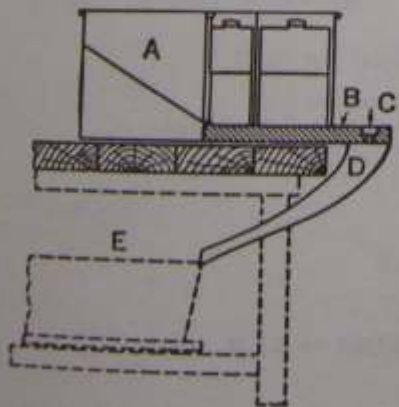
Cross-section of bins showing chute for drop delivery: *A*, bins with sloping bottom; *B*, top of fixture; *C*, countersunk holes in top of fixture; *D*, chute; *E*, container for finished assemblies.
